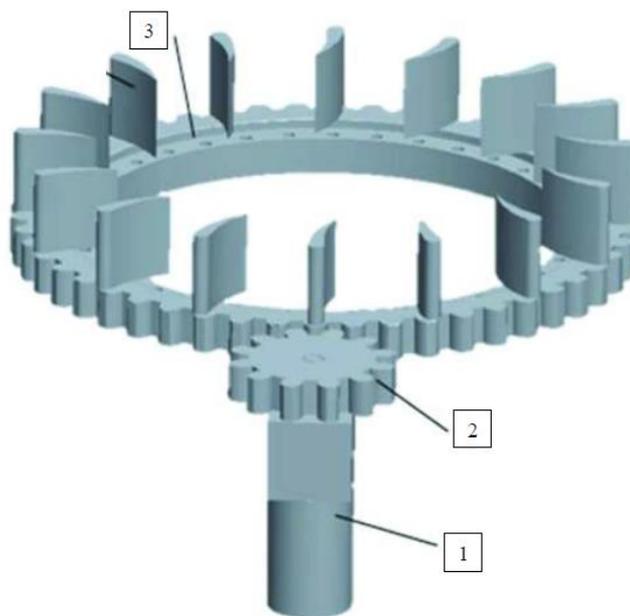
The configuration of: 1) Driving shaft, 2) Driving gear and 3) Driven gear
